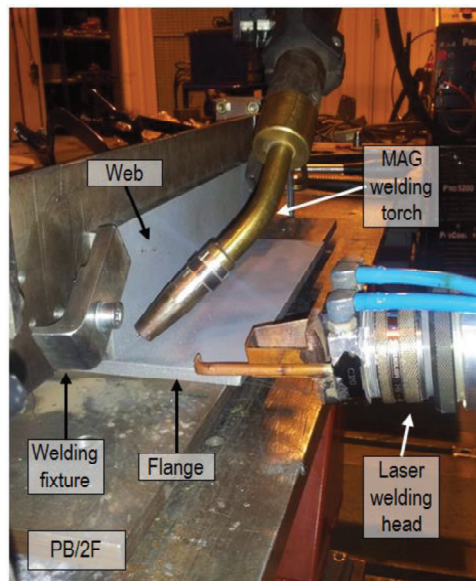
Experimental setup used for laser and laser-arc hybrid welding of T-butt joint, flat welding position.
